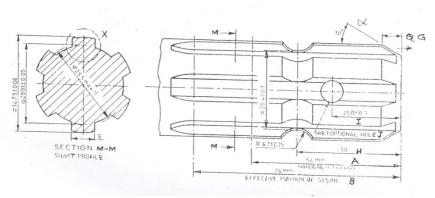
Dimensions of Implement Power Input Shaft, mm
